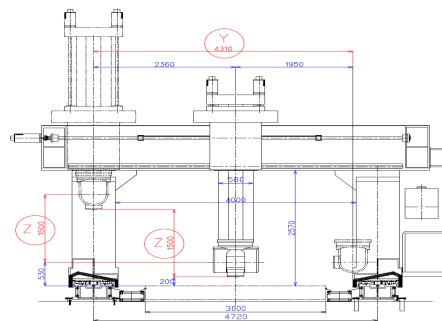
Design of large gantry type 5-axis multi-working process machine
